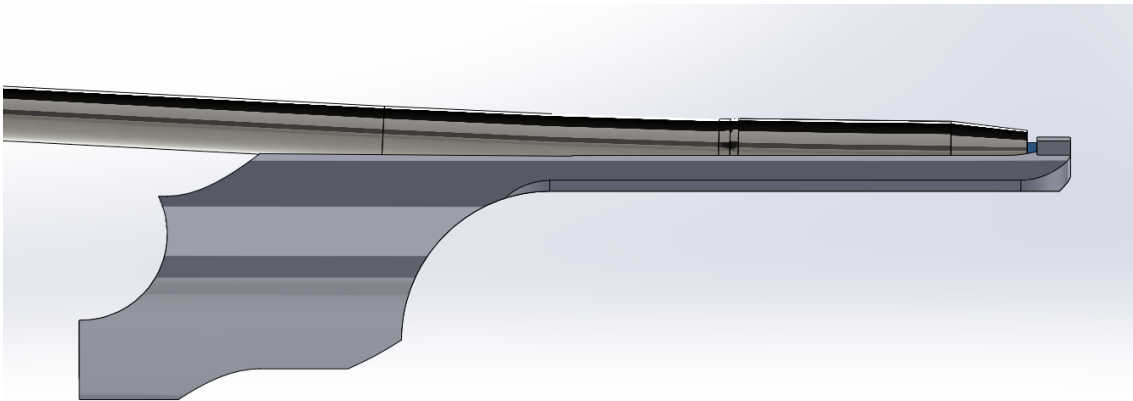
Side view of the adjusted jaw with integrated Eagle Eye Platinum ST catheter, mounted on a guidewire.
